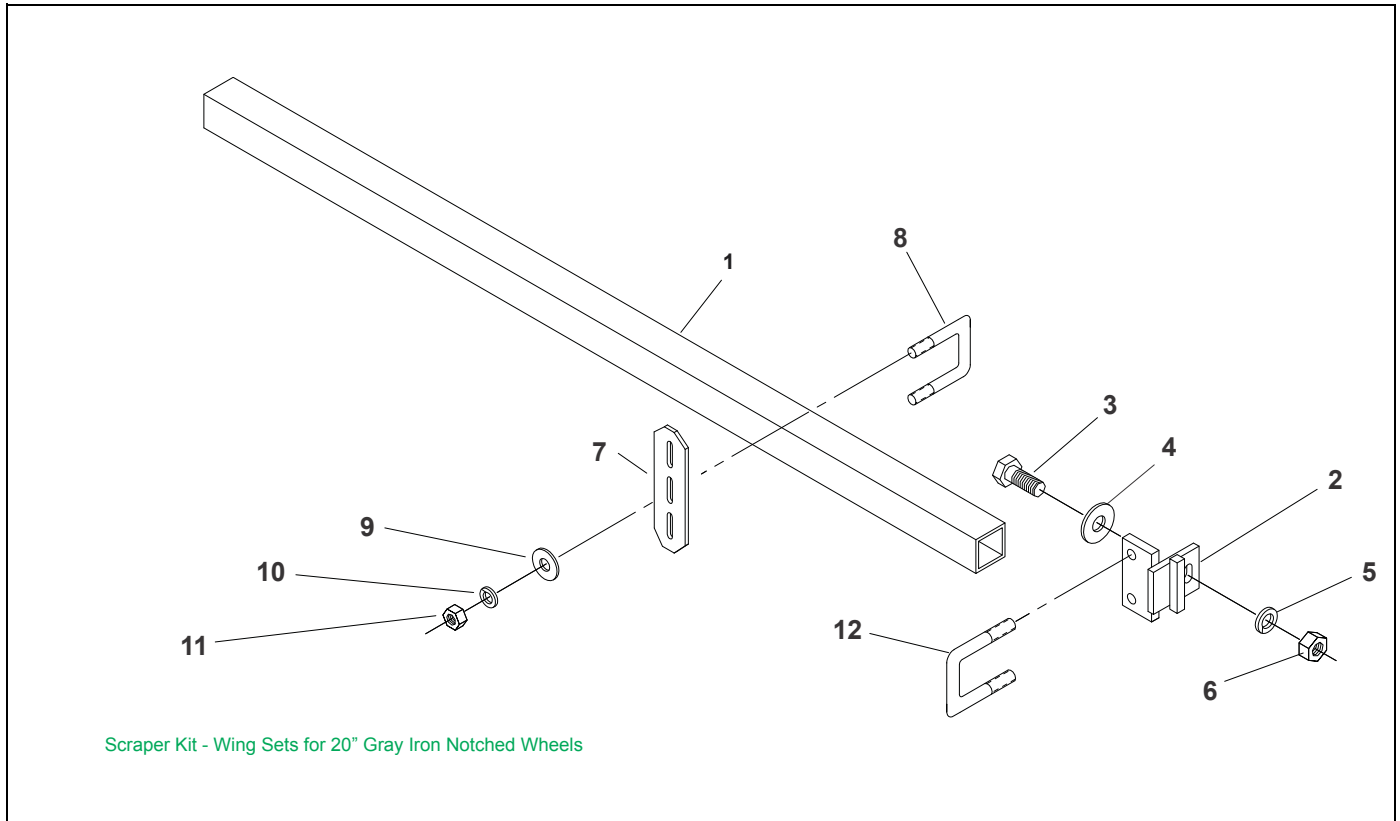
Scraper Kit - Wing Sets used with 20" Gray Iron Notched Wheels - Optional
